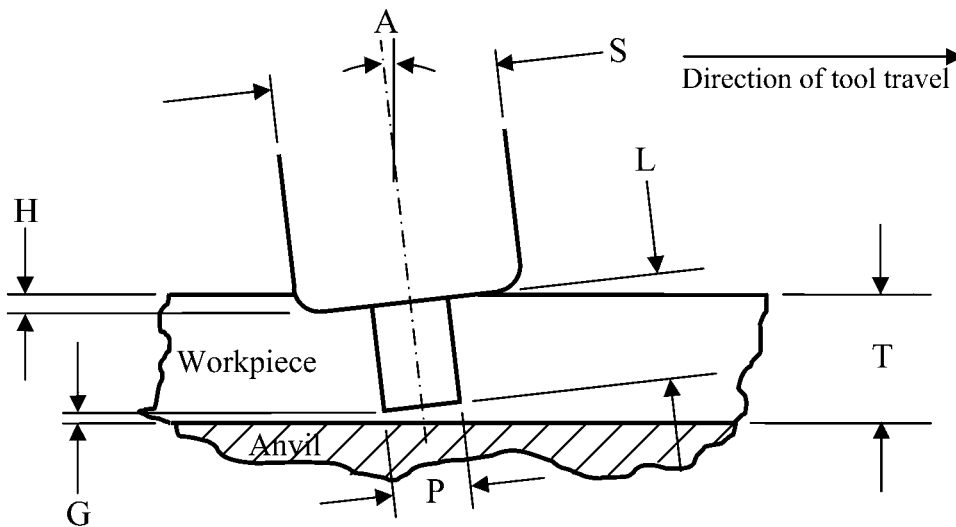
Schematic of friction stir welding tool, anvil, and workpiece for flat-tipped pin and tilted tool axis, side view. See text for an explanation of the variables.
